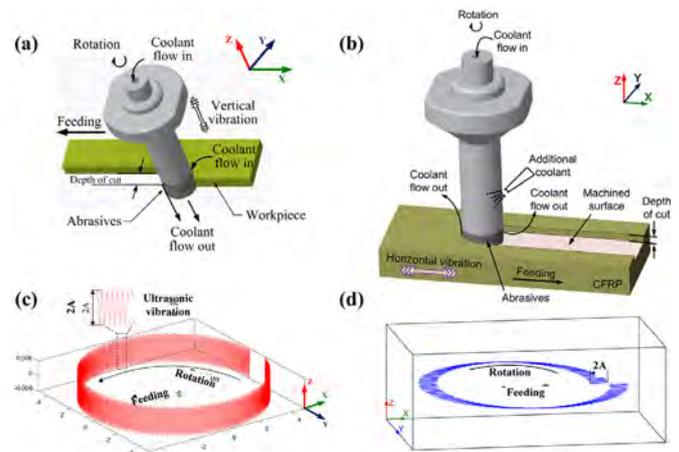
The 1D UVAG process with vibration direction parallel to the machined surface [83,158]. (a) vibration direction parallel to the axial direction of the grinding wheel; (b) vibration direction parallel to the workpiece feed direction; (c, d) abrasive grain trajectories of different vibration directions.
